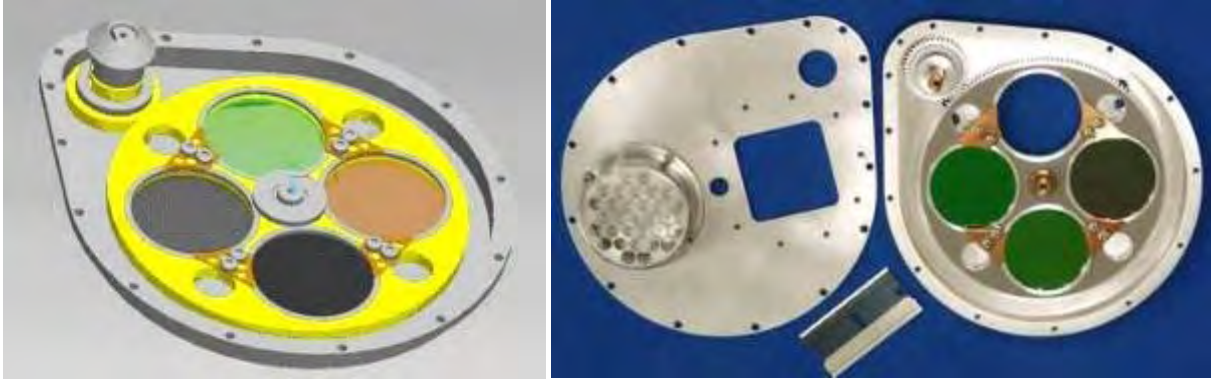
3D CAD model of the cold filter wheel (left), and the as-built parts with radiation shield (right).
